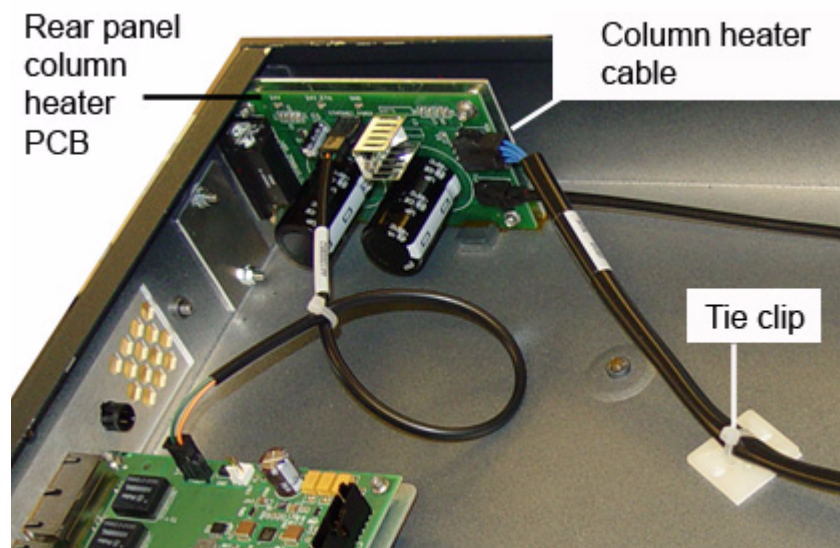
Column Heater Cable Connector on Rear Panel PCB
